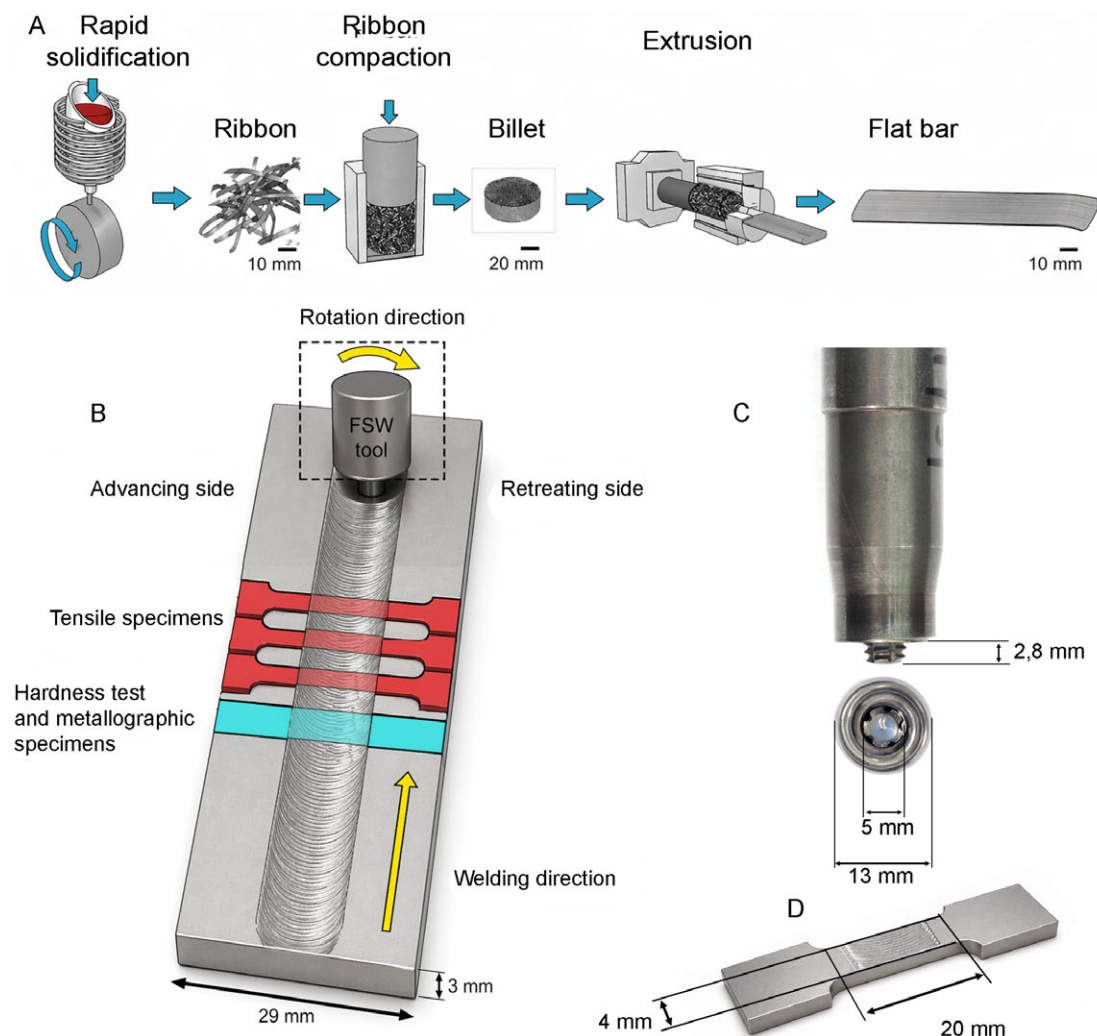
Schematic illustration of the material processing route and specimen preparation: (A) rapid solidification and extrusion process, (B) friction stir welding (FSW), (C) welding tool, (D) specimen extraction for uniaxial tensile testing
